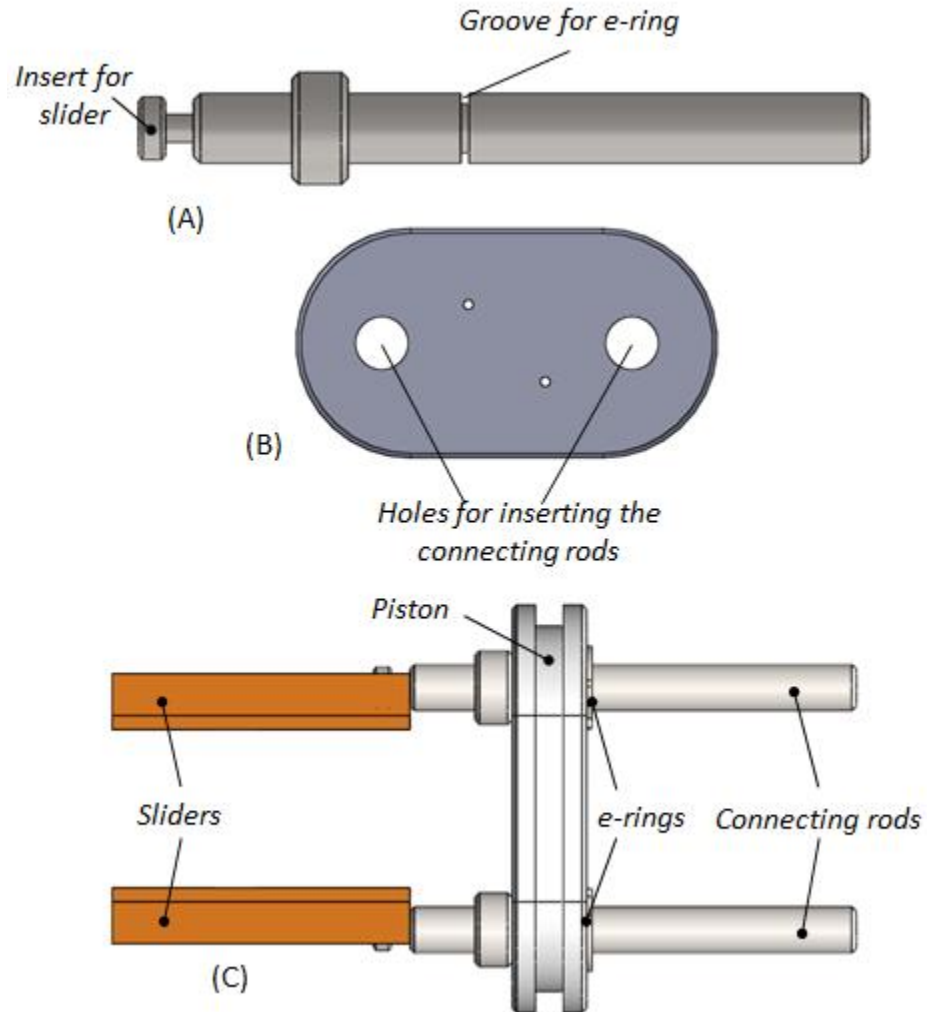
(A) Design of the connecting rod; (B) Design of the piston; (C) Sliders, connecting rods and the piston assembled together.
